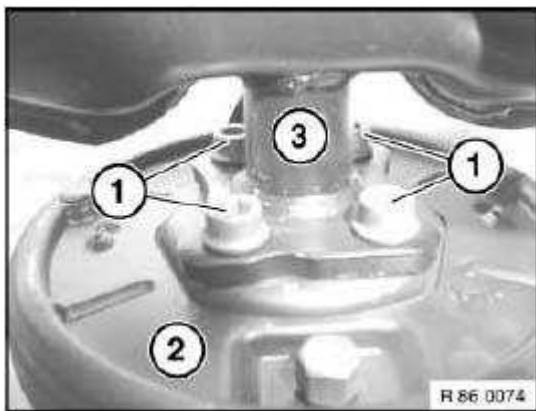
Identifying Screws, Wheel Brake & Trailing Arm
